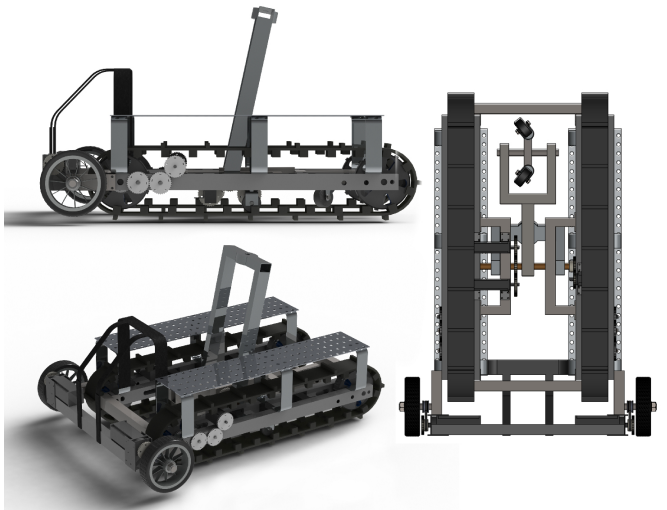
WRS-Telebot Mobile Base CAD Rendering
